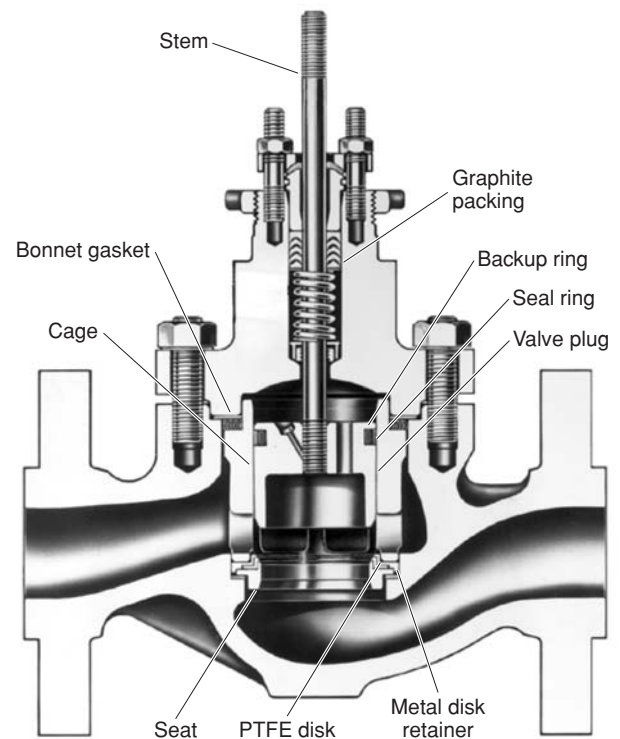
Cage-guided balanced plug globe valve with polymer seat and plug seal. (Courtesy Fisher Controls International LLC.)
